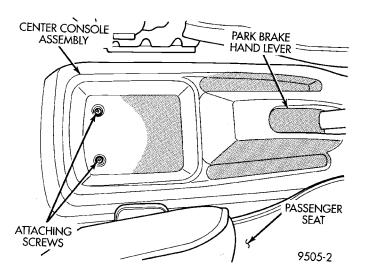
Center Console W/O Arm Rest Rear Attaching Screws
